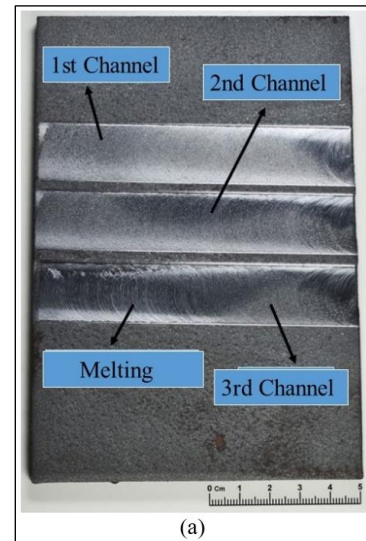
Sample without sealant (nose radius 0,4 mm): (a) Machined surfaces.
